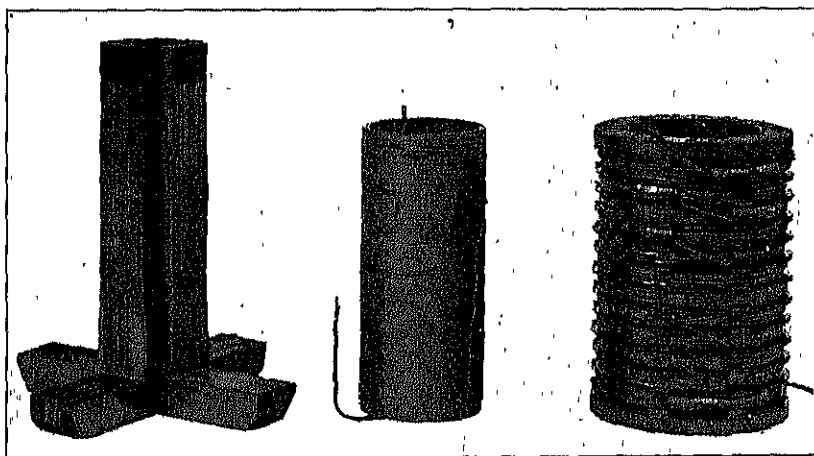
Method of assembling core and coils of large capacity four-part distributed core type transformer.
